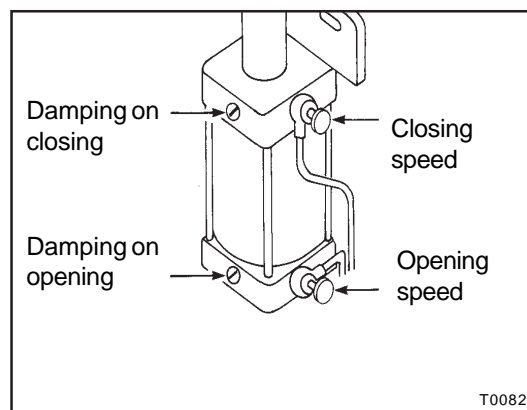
Adjustment screws on door cylinder (Protective cover of cylinder removed)
